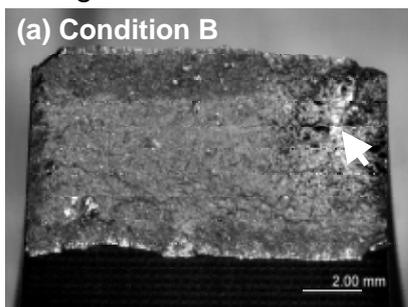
Fatigue fracture surface of laser peened coupon specimens
